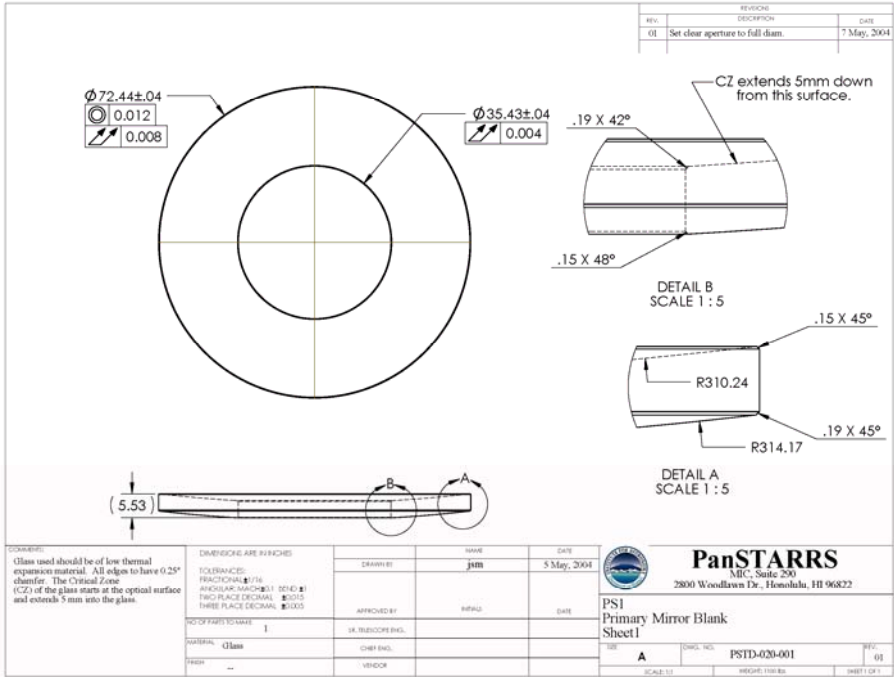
The PS-1 Primary Mirror Blank Dimensions.
